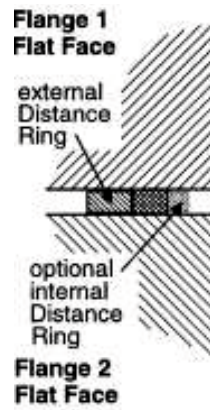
Assembly situation of gaskets in MMC type flanged joints (schematics)
